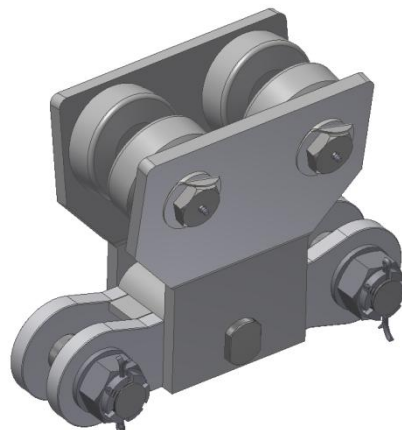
the vertical-vertical bracket fixing system arrangement.
